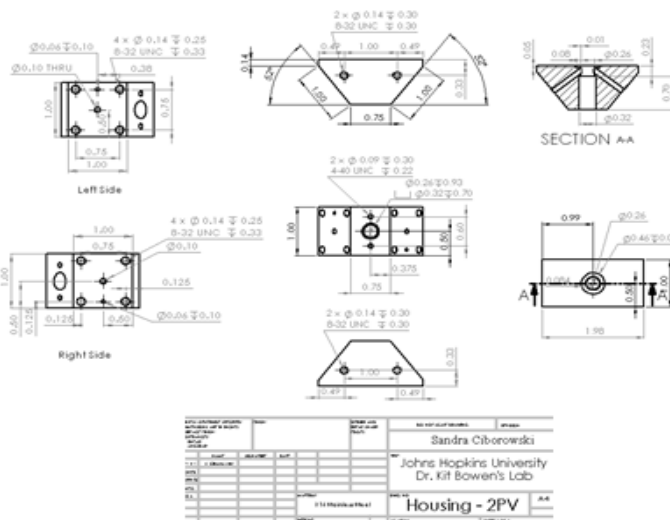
Part and Schematic Drawing of Housing for Two Pulse Valves.
